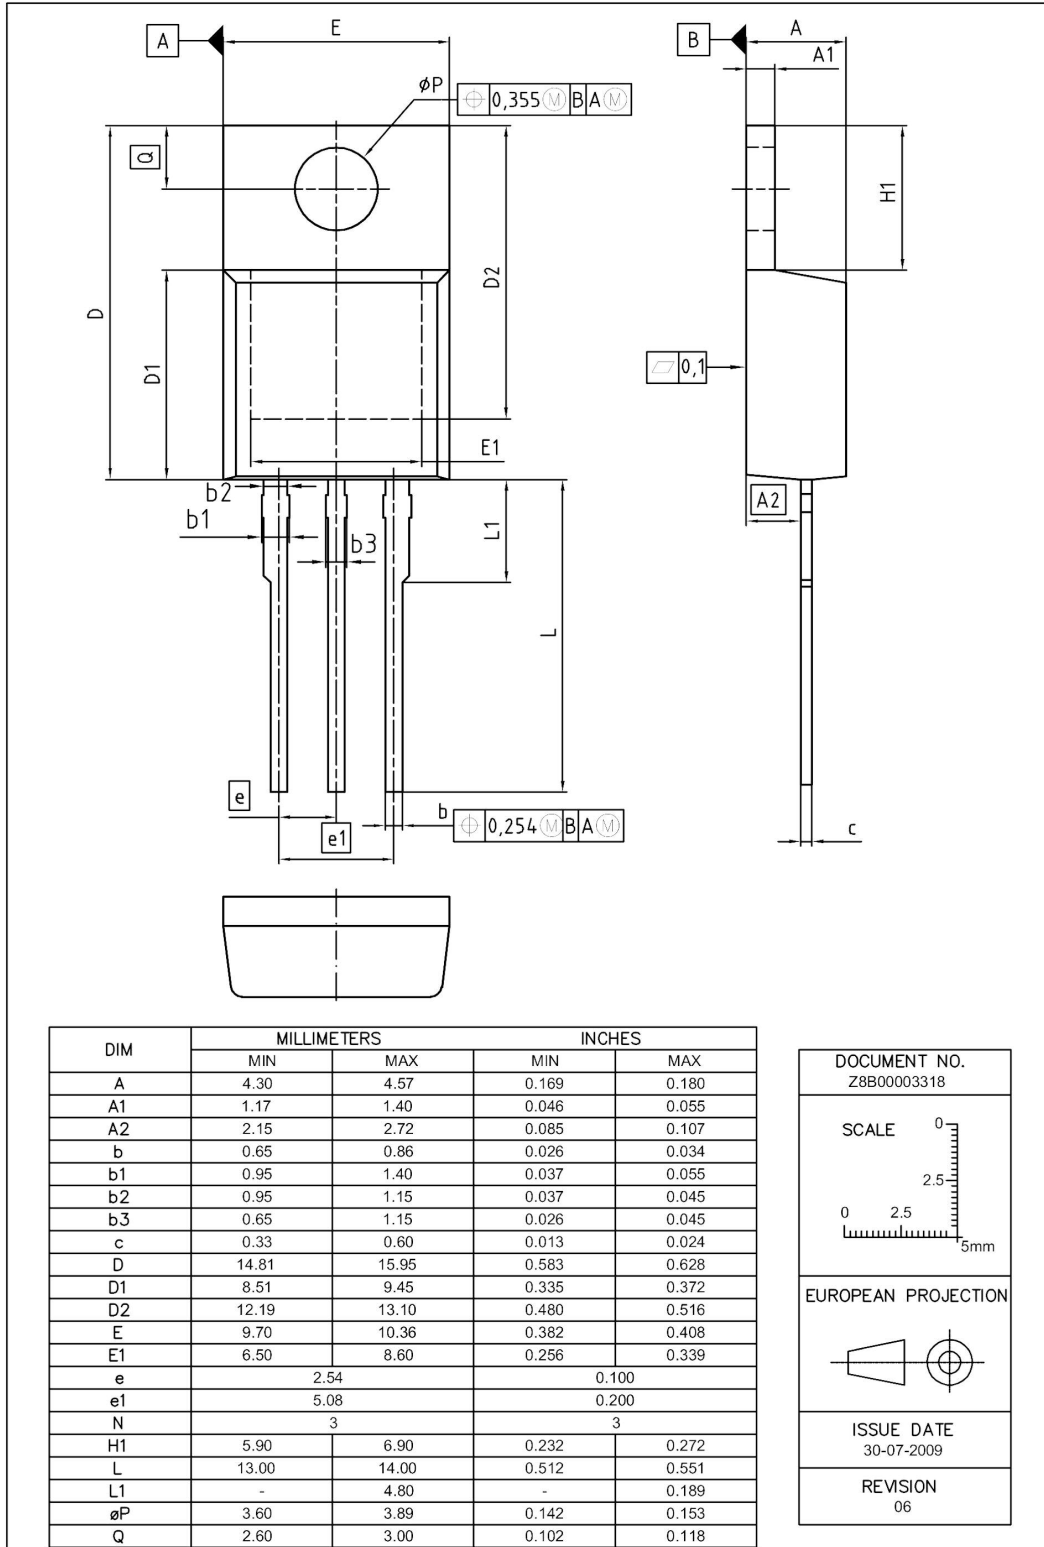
Outline PG-TO 220, dimensions in mm/inches
